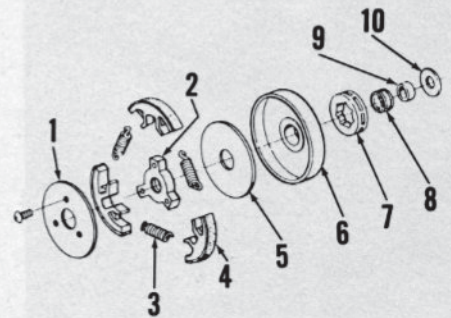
Exploded view of clutch assembly used on late Model 360 series.
